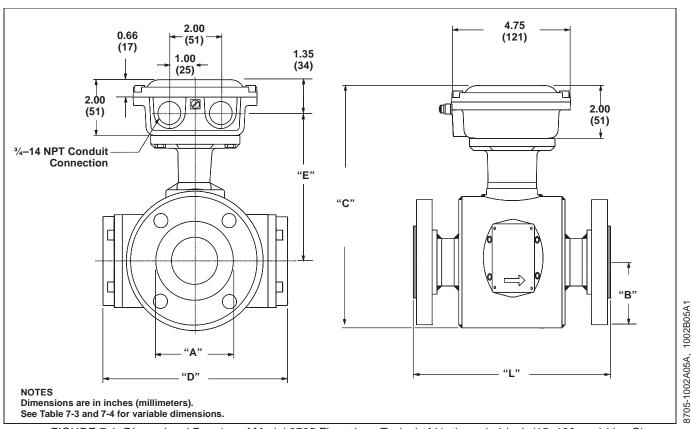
Dimensional Drawing of Model 8705 Flowtubes, Typical of ½- through 4-inch (15-100 mm) Line Sizes.
